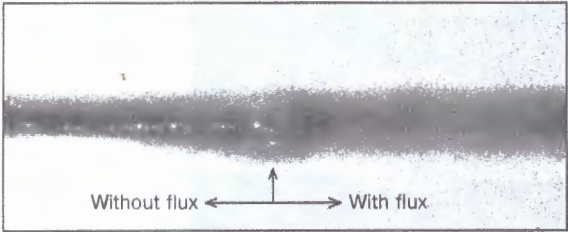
X-ray photograph of 2 mm thick AlMg4.5Mn alloy welded joint made by a conventional technology and with the use of flux
